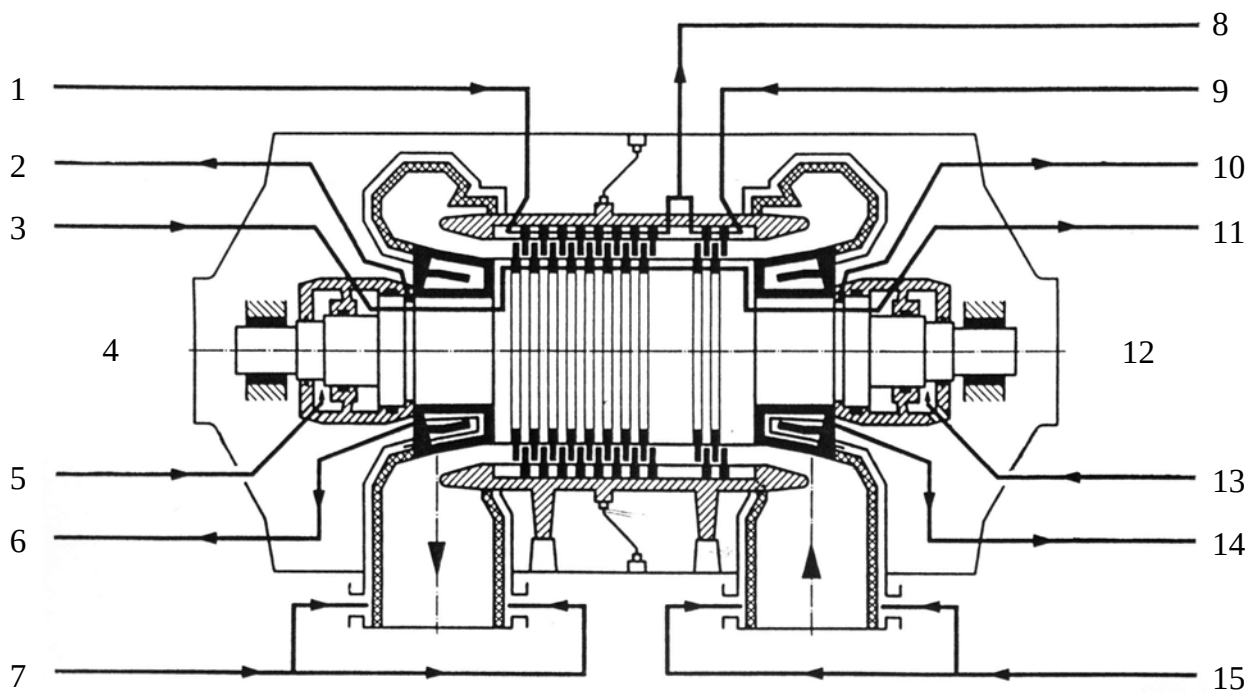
Longitudinal section of the HHV turbo machine: (1: rotor, 2: outer casing, 3: bearings, 4: labyrinth seals, 5: shaft seals, 6: stationary blade carrier, 7: blades, 7.1: turbine section, 7.2: compressor section, 8: connecting nozzles to and from hot gas ducts)
